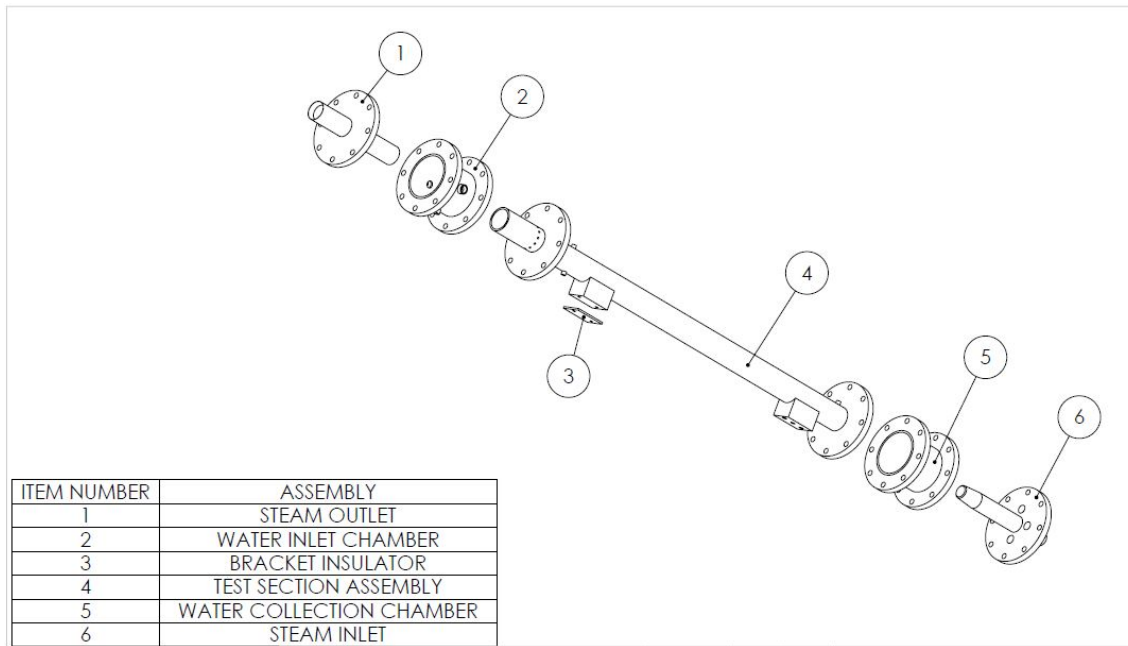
Exploded diagram of the original test section as designed by Ritchey [21]. The major modifications for the proposed research include welding an additional flange to the steam outlet and repairing a broken weld on the steam inlet.
